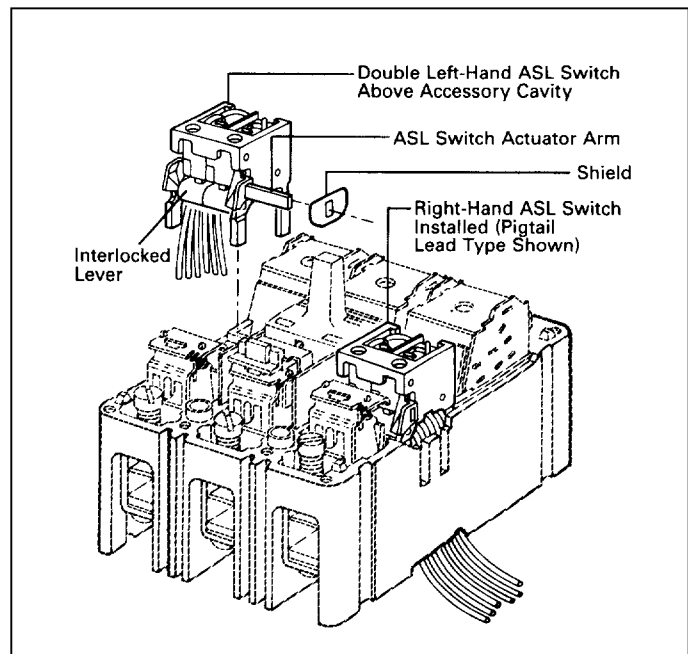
Double Alarm (Signal)/Lockout Switch Installation Positions
